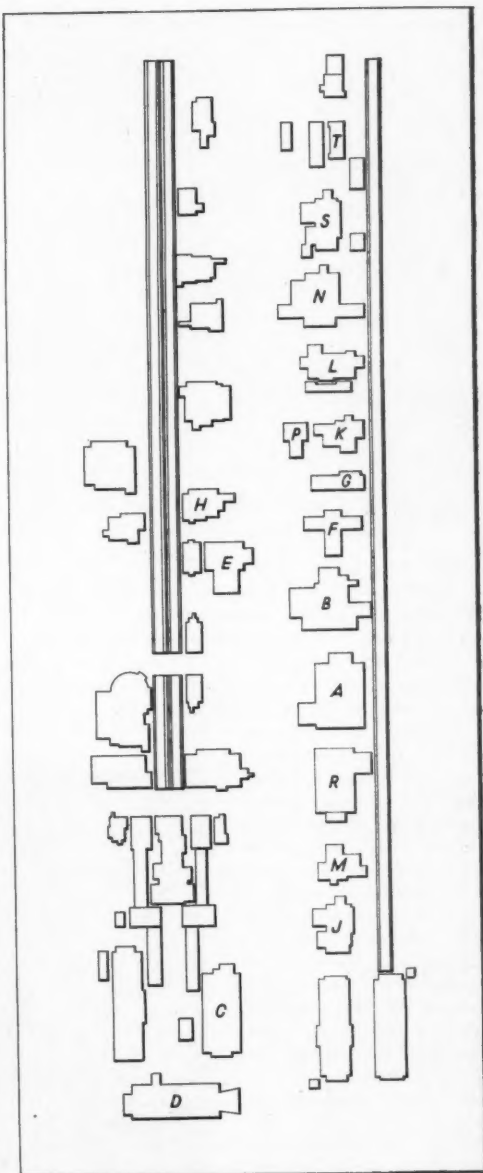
This drawing, prepared from a print similar to that shown in Fig. 5, indicates the positions of the machines employed for operations on the two parts of the pinion carrier, and on the complete unit after assembly
